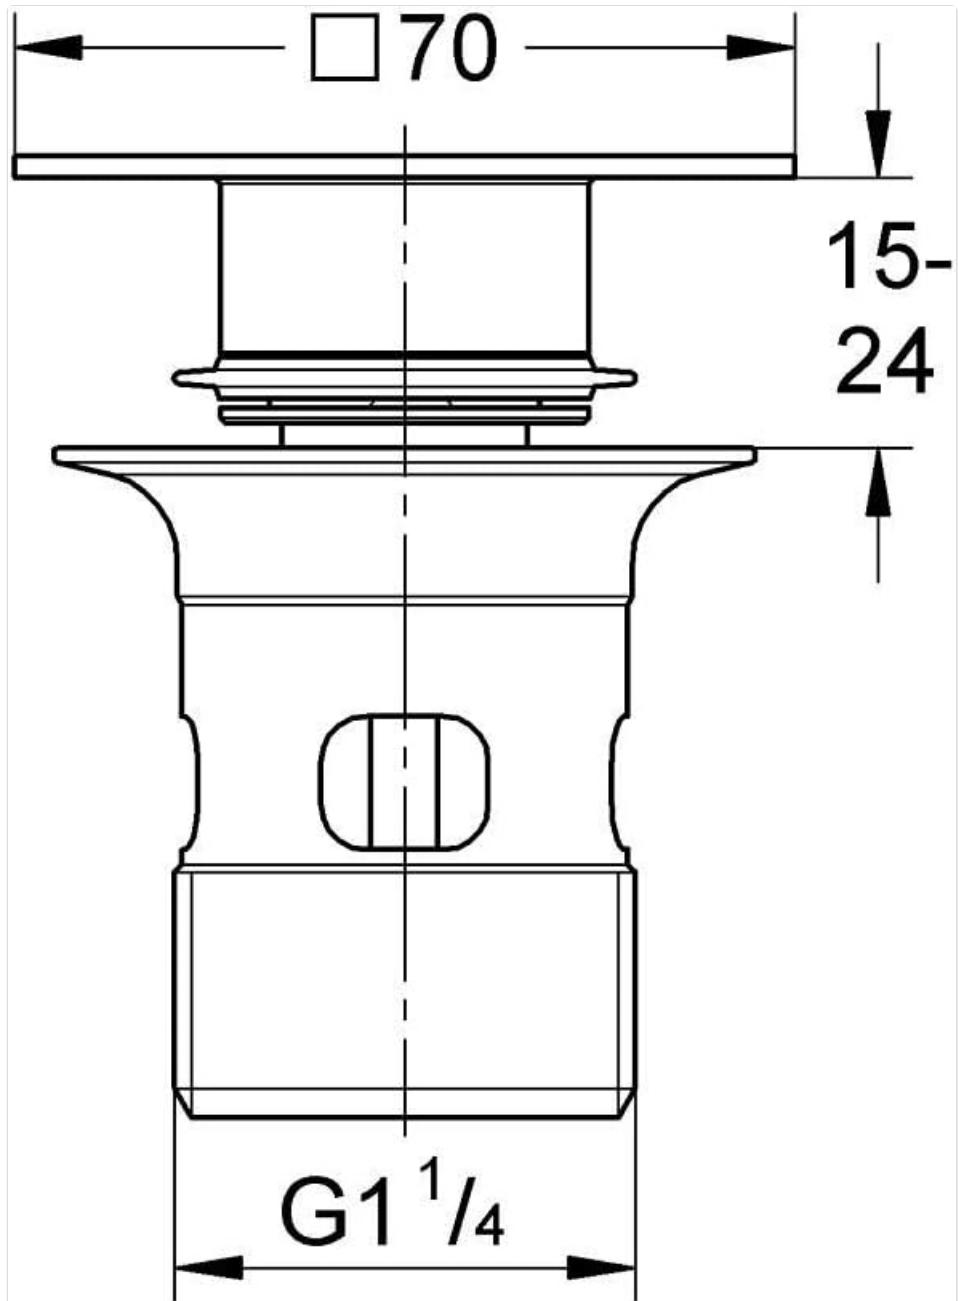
Technical drawing illustrating the GROHE Square Drain Plug with key dimensions. The top square plate measures 70mm, the adjustable height from the sink surface to the top of the plug is between 15-24mm, and the siphon connection is G1 1/4.
